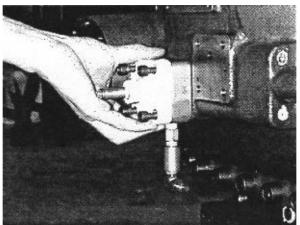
Mounting the Solenoid Valve with the Solenoid Valve Plate
